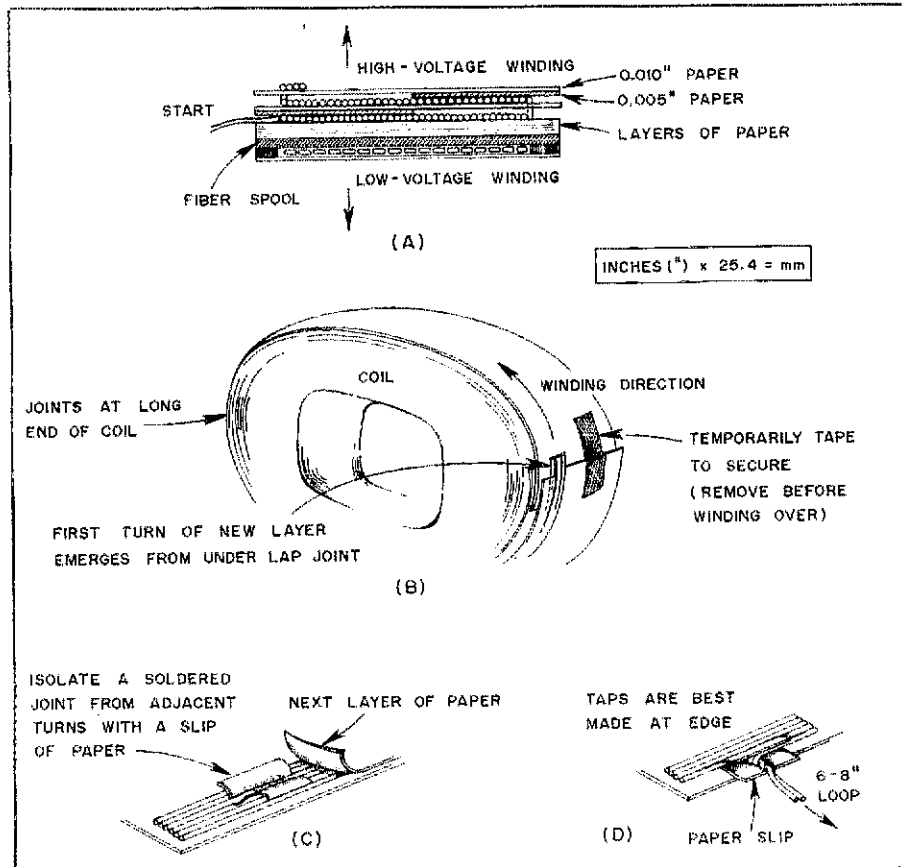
Details of the new winding. At A is a cross-sectional view of the winding. B shows how the insulating paper is installed. A soldered joint can be isolated as indicated in C. D illustrates the method of providing taps on the winding. Each layer takes about a half hour to install.
